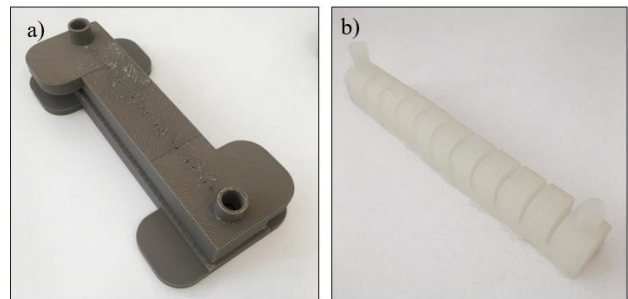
a) Soft Finger Mould Model of Prototype 2, b) Soft Finger Top Extracted from the Mould
